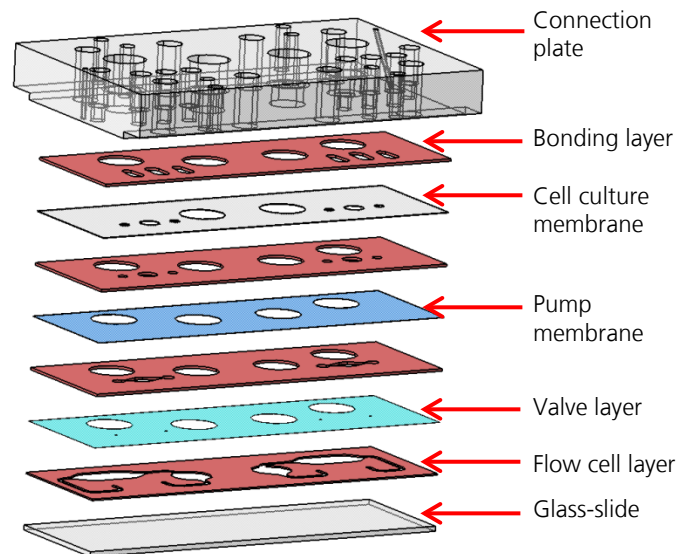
Exploded view of multilayer based lab-on-chip-system
